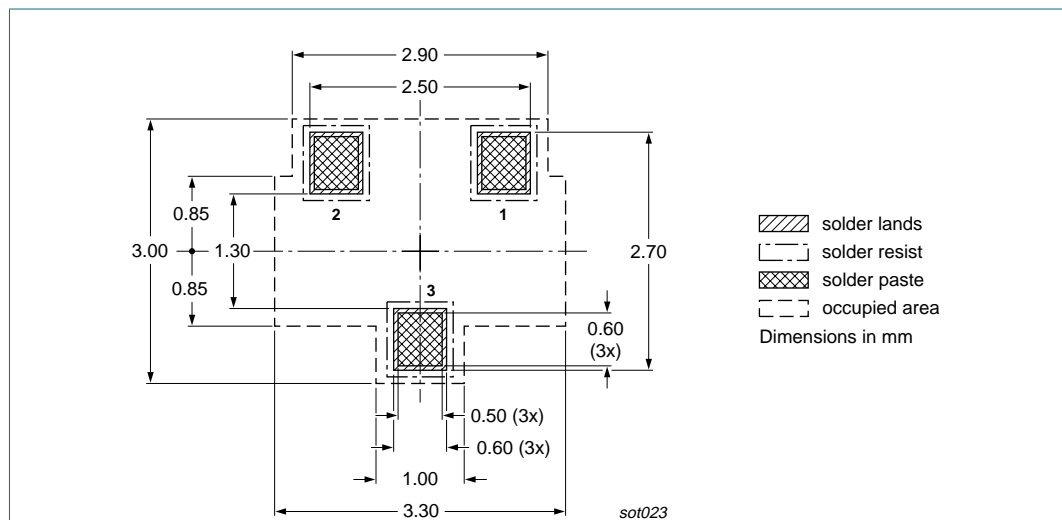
Reflow soldering footprint SOT23 (TO-236AB)
